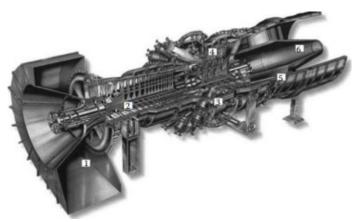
Represting the Combustion turbine (1) Air intake section; (2) compression section; (3) combustion section; (4) turbine section; (5) exhaust section; and (6) exhaust diffuser [Routledge].
